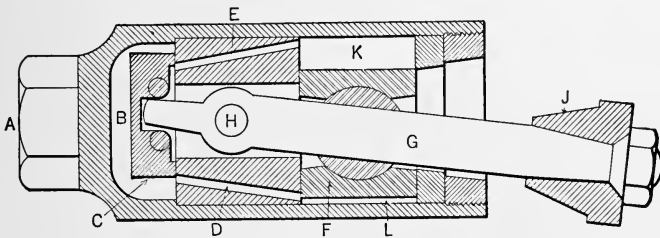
Mechanical Tube Cleaner — Hammer Type.
